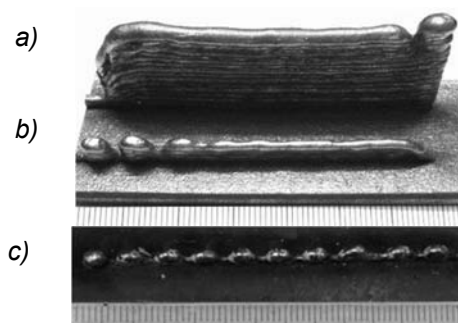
Welding by CMT process at welding current 40 A (different welding speeds from top to bottom: 3, 7.5, 12 mm/s)
